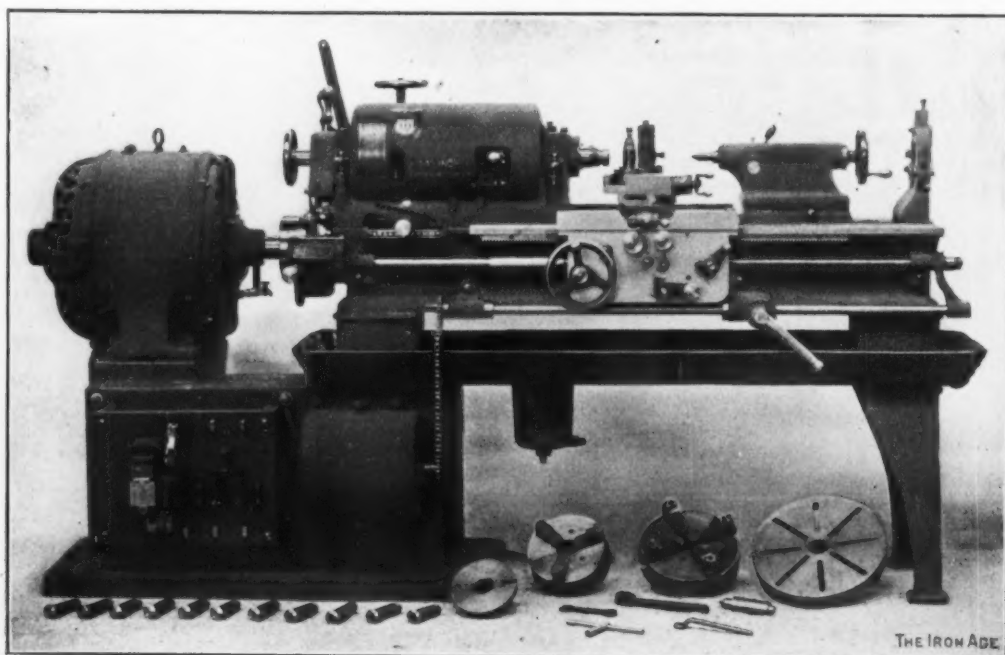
A 14-In. Lodge & Shipley Toolroom Lathe with $2\frac{1}{2}$ -Hp. Triumph Motor.
